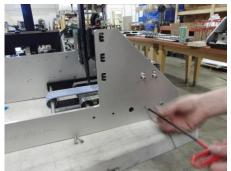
Remove all screws on the right feeder panel. Note: top screws are 3/4", bottom screws are 1"
